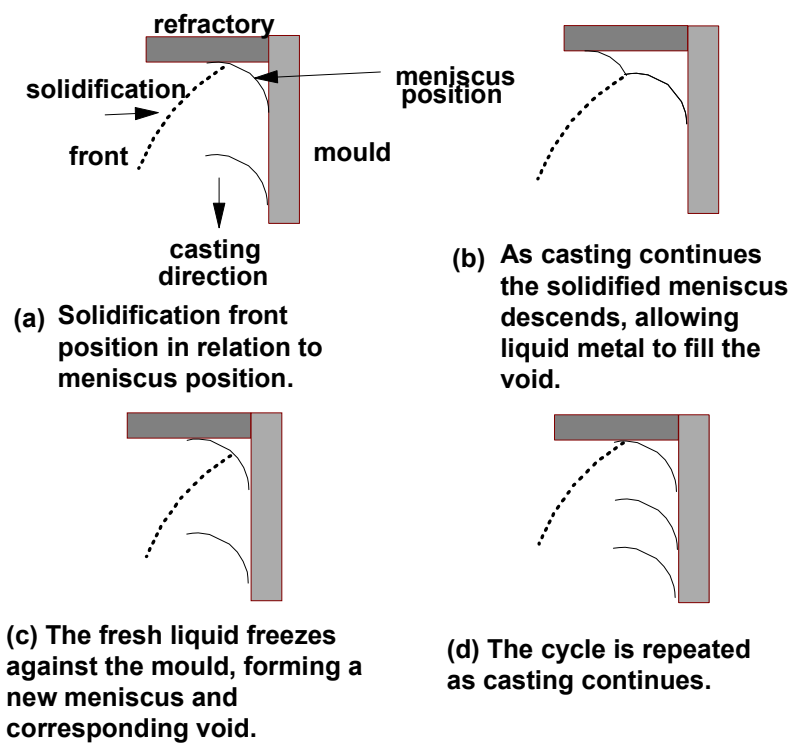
Schematic of the mechanism of cold folding in a hot top mould.
